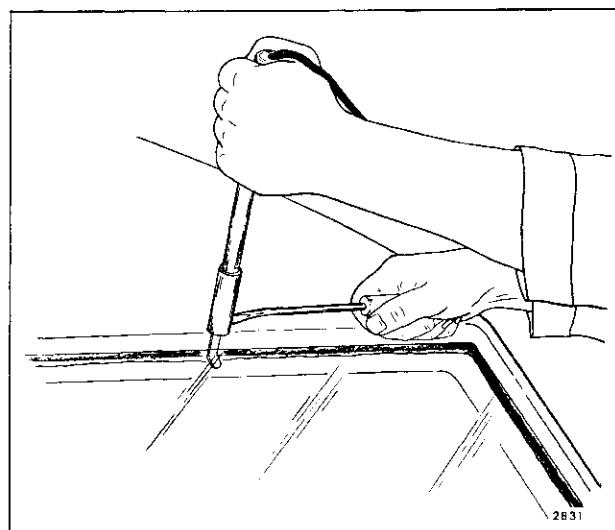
Adhesive Caulked Glass Removal - Electric Hot-Knife Method
